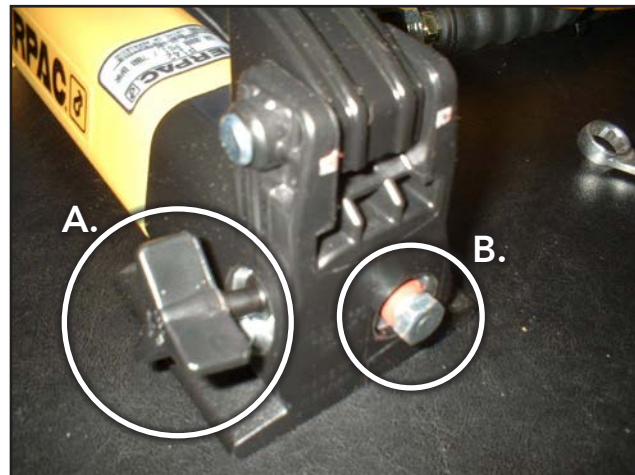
Flow control valve (ring A) and the plug to be removed (B).
